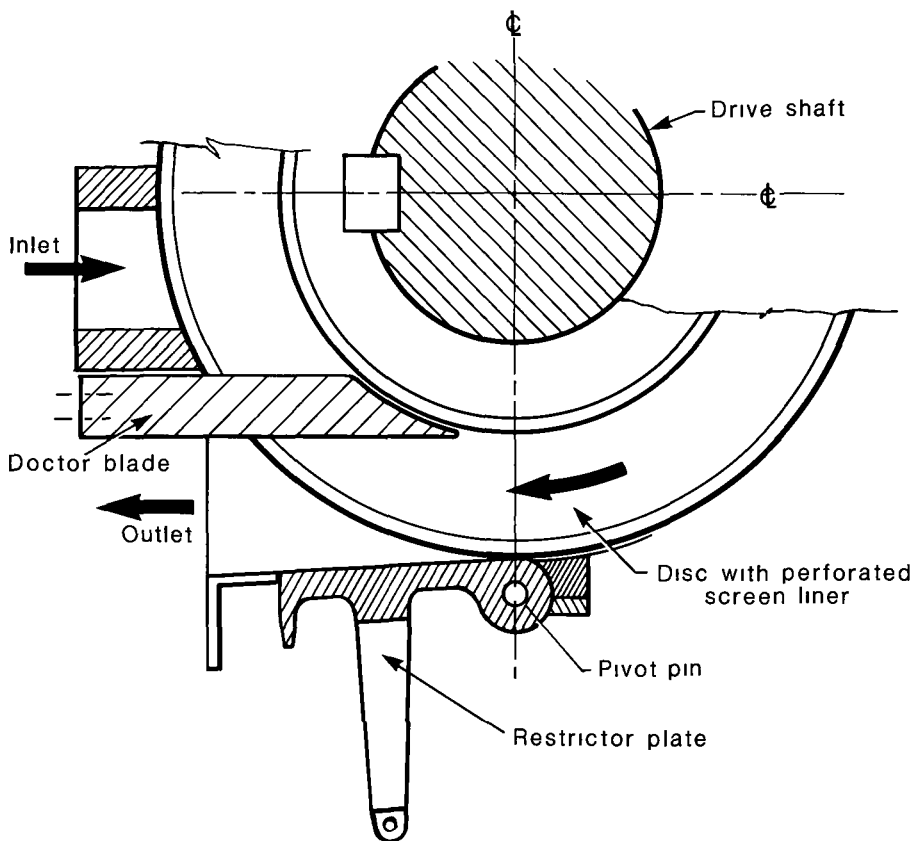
Partial Cross Section Showing Original Ring Press Discharge Arrangement
